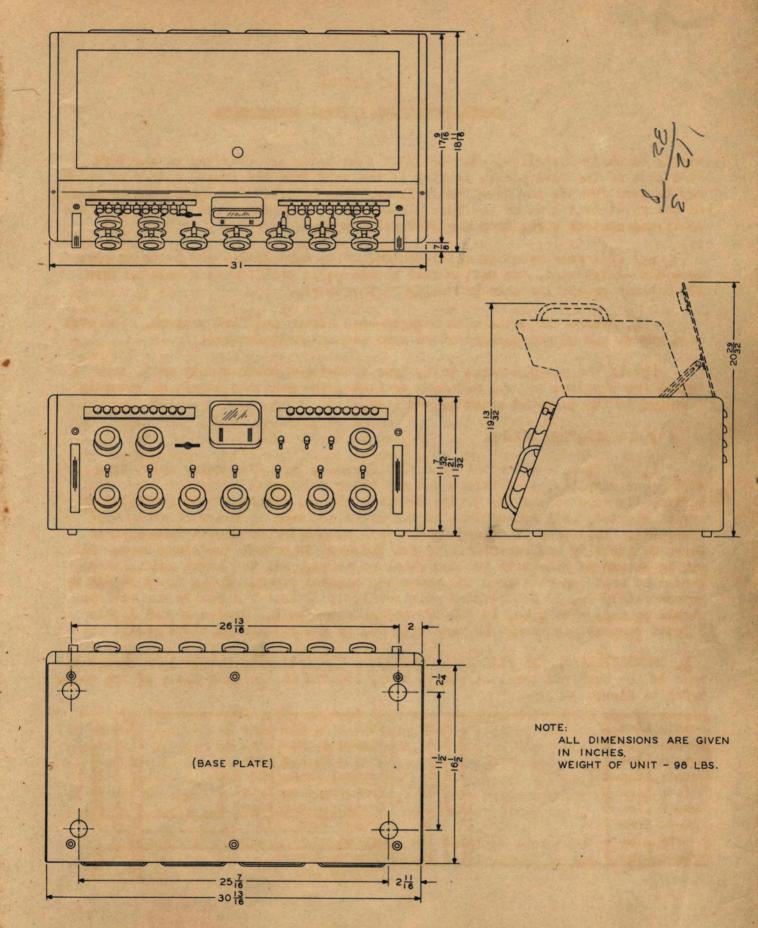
Type 212B Console, Outline and Mounting Dimensions
